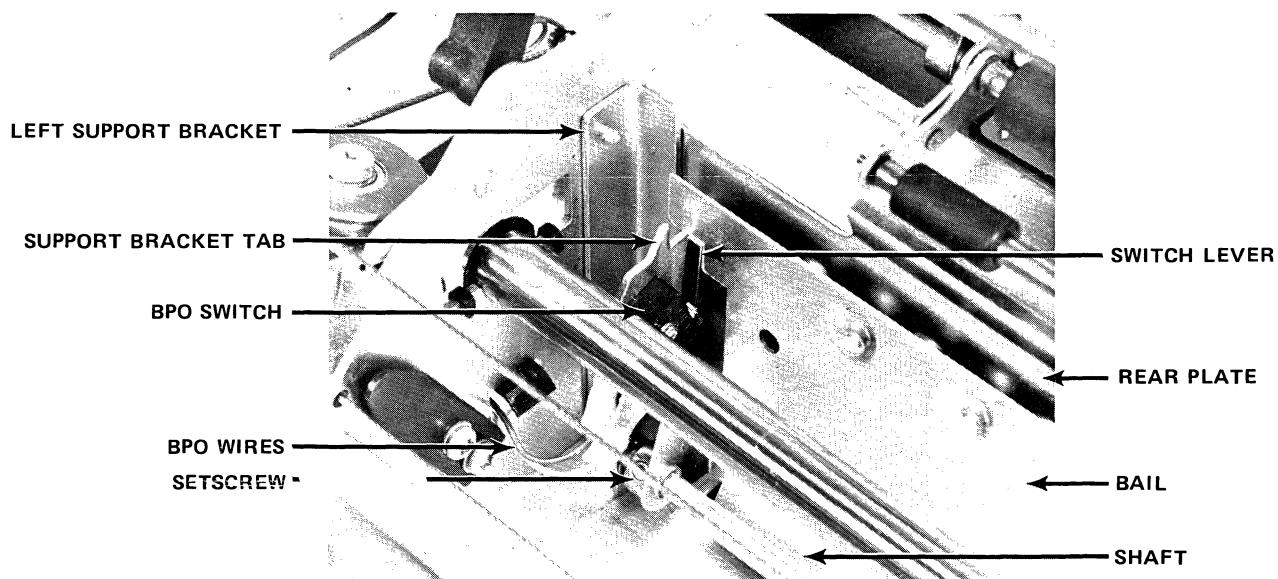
BOTTOM PAPER OUT BAIL AND SWITCH ADJUSTMENT
